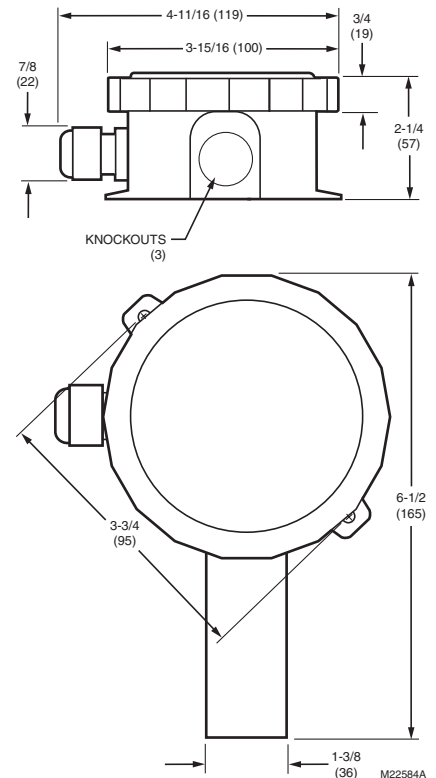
Outdoor-mount Sensor Dimensions in Inches (mm).
